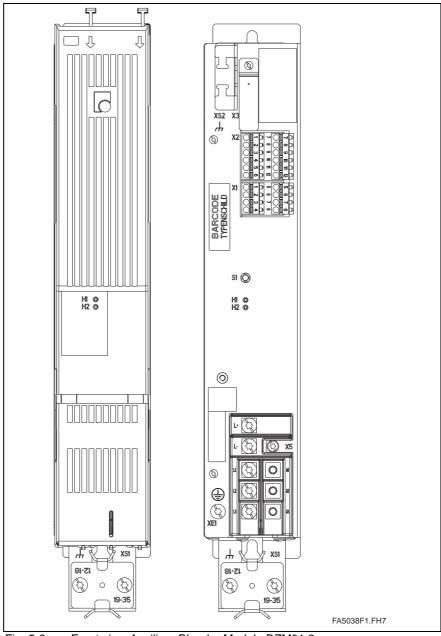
Front view Auxiliary Bleeder Module BZM01.3
